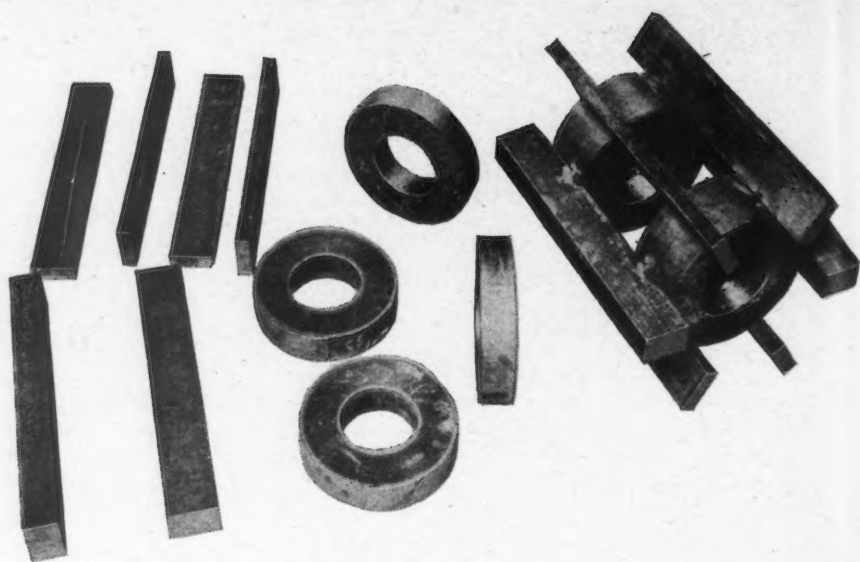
Rotor spiders are fabricated from flame-cut rings and bar stock.
